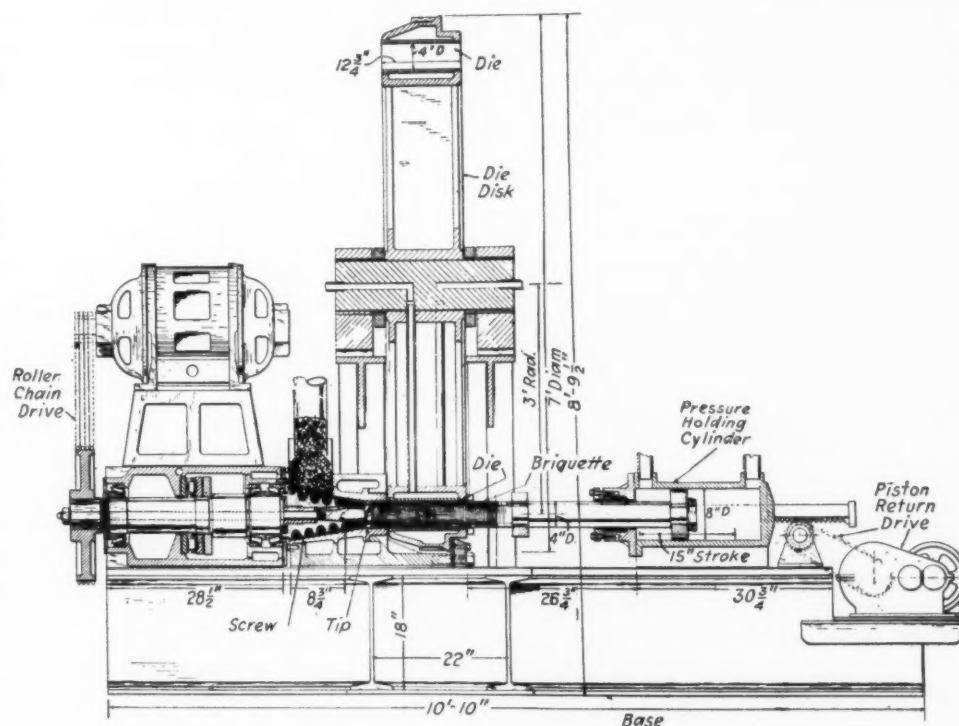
SECTIONAL DRAWING SHOWING COMPLETE DETAILS OF WOOD-BRIQUETTING MACHINE
